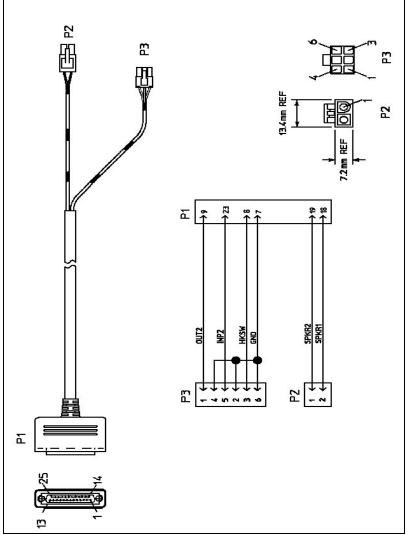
Remote Mount Standard Accessory Cable 19B802554P6
